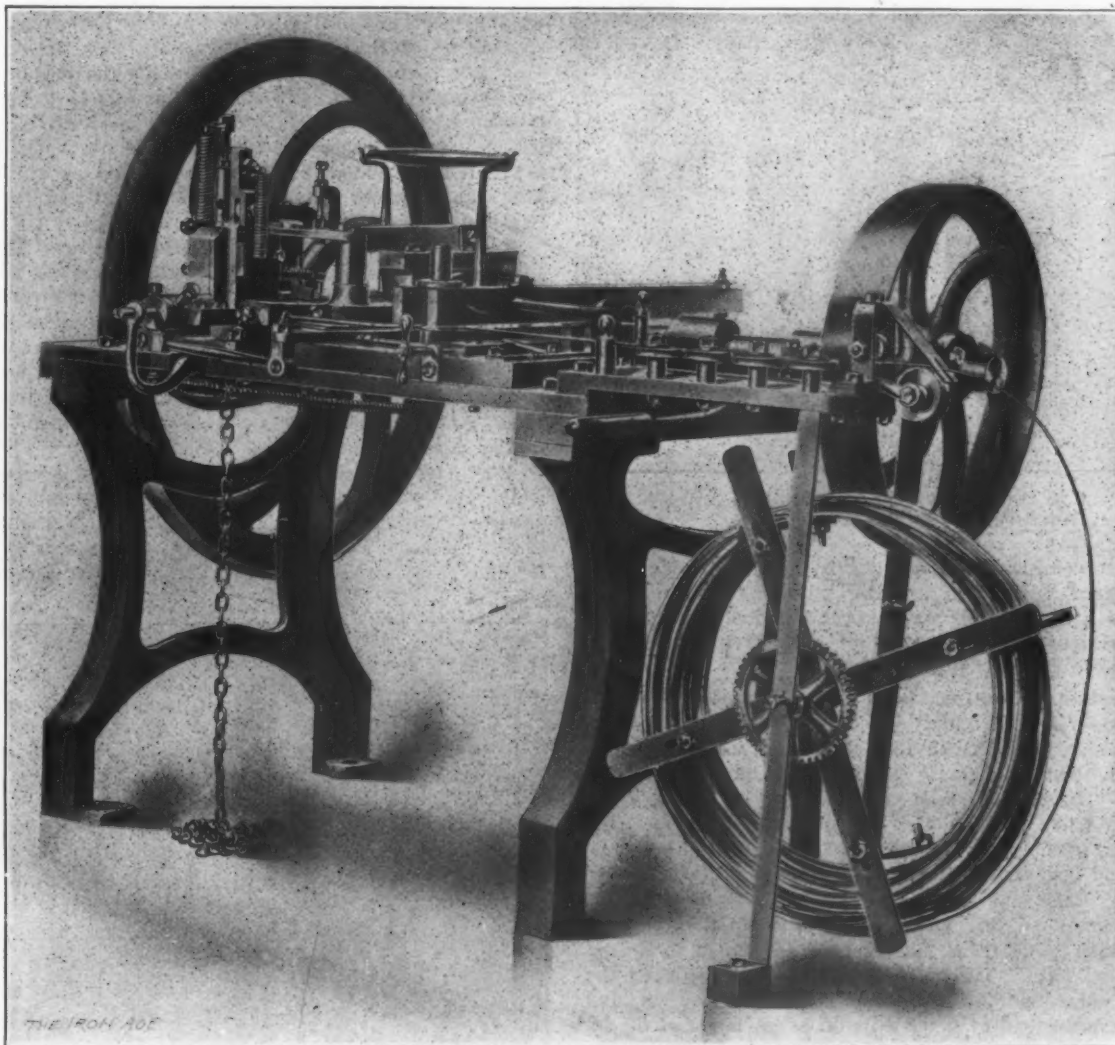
A No. 3 Giraud Bending Machine, Capable of Automatically Cutting and Welding 20,000 Links of 9-32-Inch Chain Per Day.
